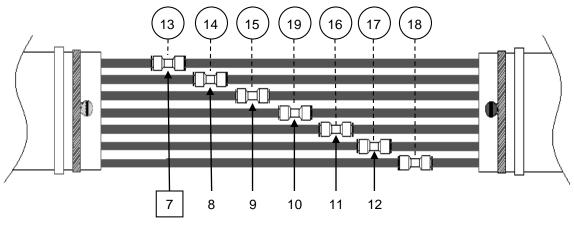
Install Outer Ring Tube 7 Coupling Opposite Inner Ring Tube 13 Coupling
